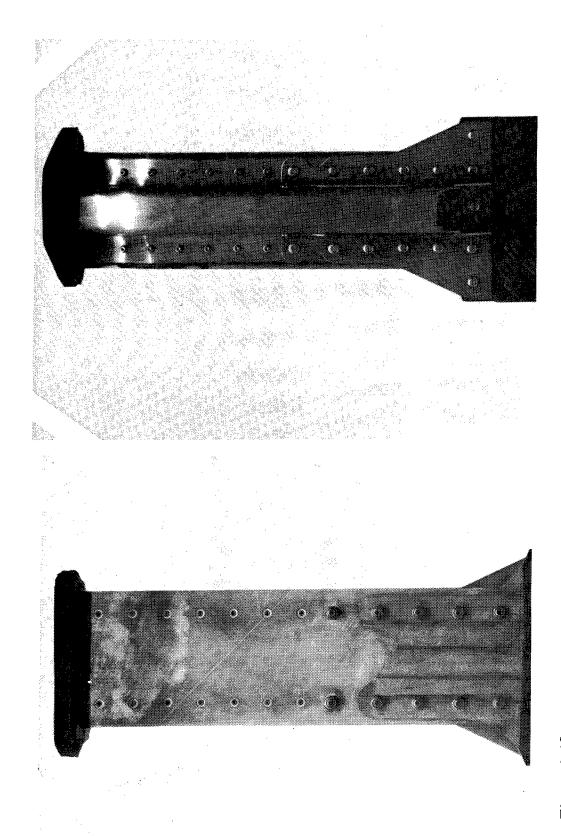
Riveted Compression Load Introduction Fitting after Testing.
